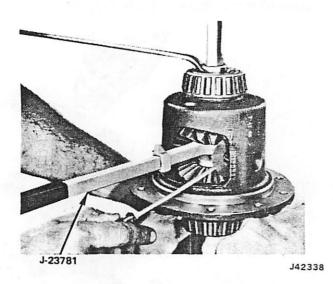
F-75 Pinion Gear Thrust Washer Installation
